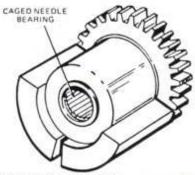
Using tool #670210, press new needle bearings into Model HM80, VM80, HM100 or VM100 belancer gears until bearing cage is flush to 0.015 inch (0.381 mm) below edge of bore.
